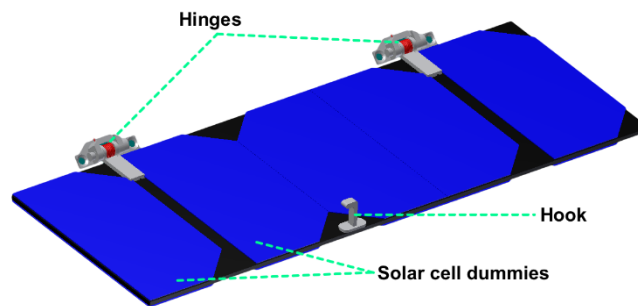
Preliminary Solar Panel Assembly for REXUS 17/18 with hinges housing the rotational springs [10].
